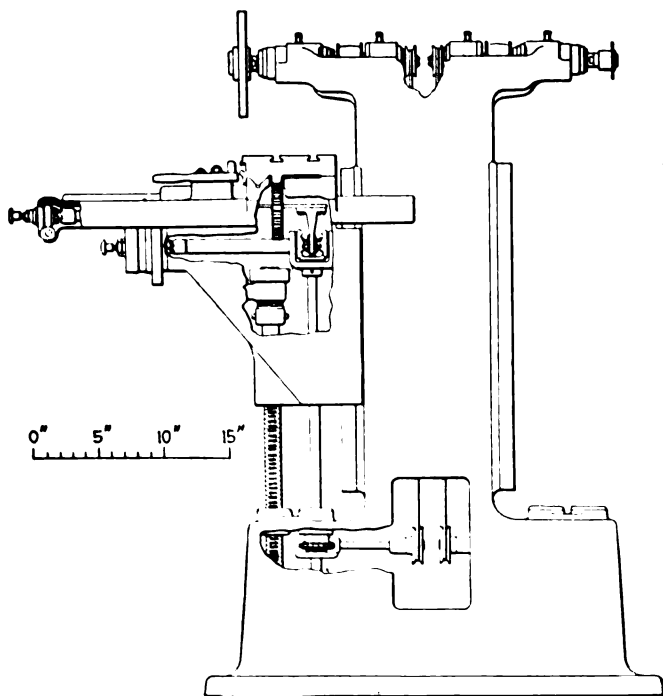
DETAIL OF FEED AND DRIVE MECHANISM
